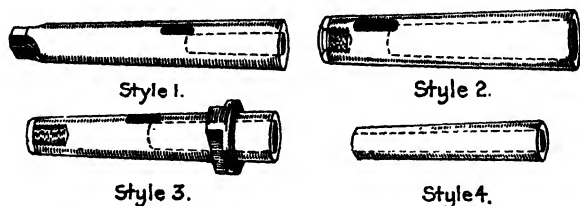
Milling-machine collets. For adapters for standardized spindle end, see Fig. 6-40.
